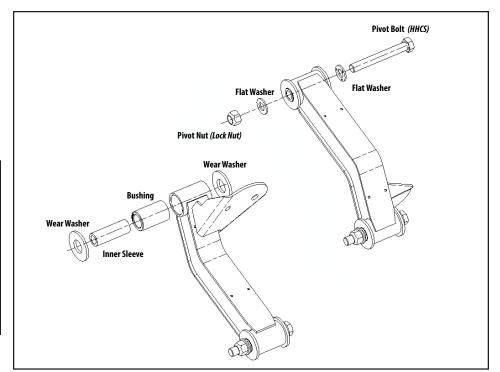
The pivot connection on the 2361000 Truck Suspension is assembled with one wear washer on each side of the torque rod eye.
